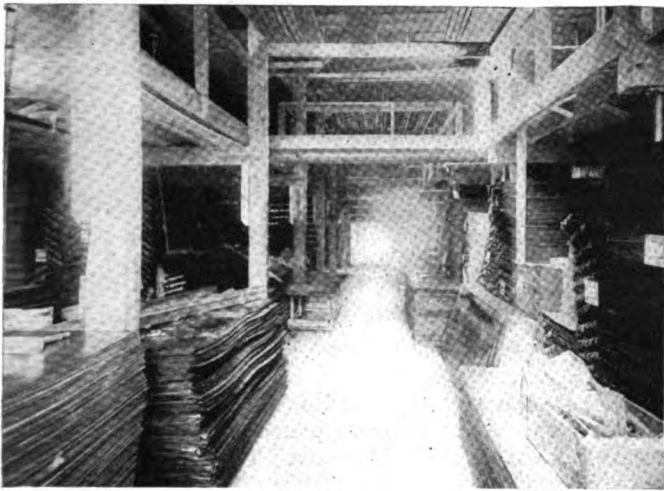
Metal raw stock room. Fig. 8—Machine used for forming metal shrouds when order is not large enough to warrant making of dies. A form, the shape of the shroud, is placed over a hydraulic ram, and the sheet is laid in this form. The ram forces the form up into the sheet.
